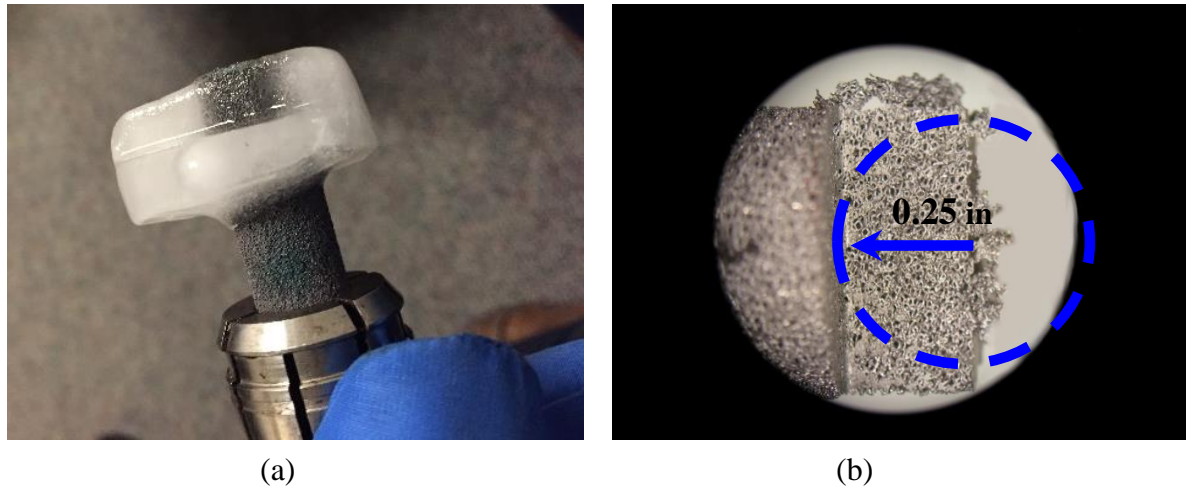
(a) Ice- infiltrated sample after machining, (b) tool cutting position (Magnification 12X)
